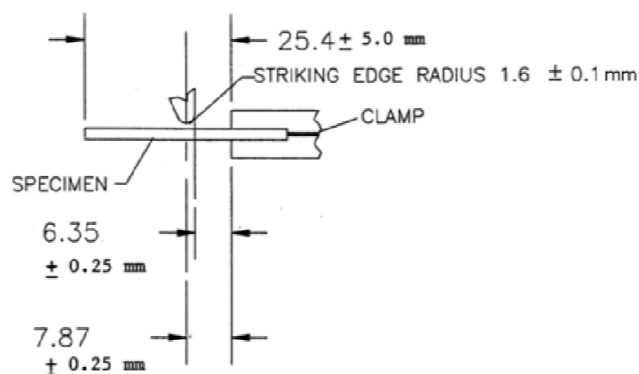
Dimensional Requirements Between Specimen Clamp and Striking Edge (Type A)
